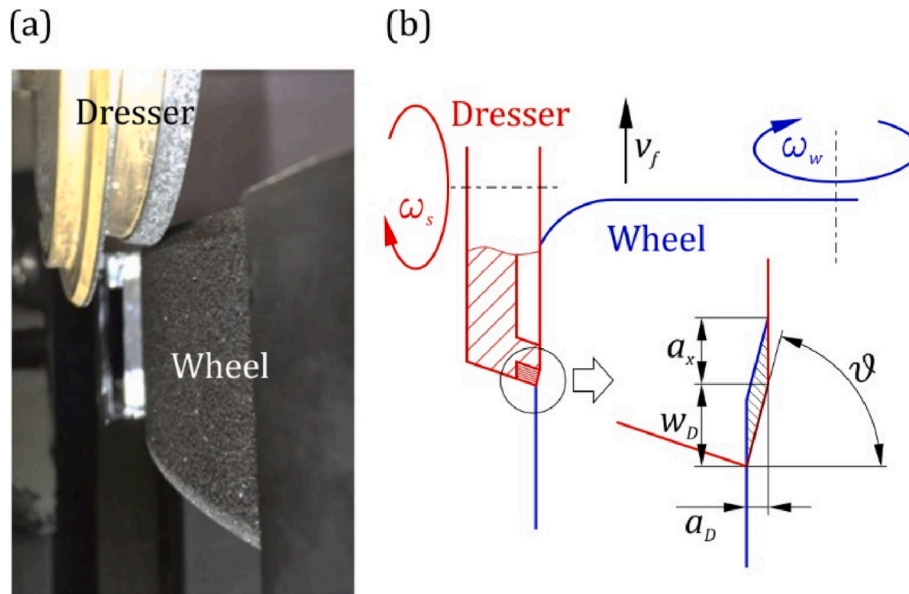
(a) CBN grinding-wheel dressing with (b) illustration and parameters.
